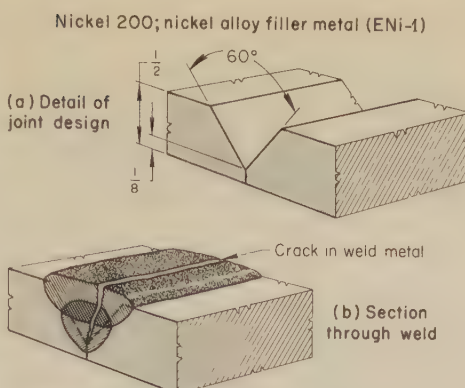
Joint design for welding 1/2-in. Nickel 200, and crack in weld metal caused by excessive heat input
